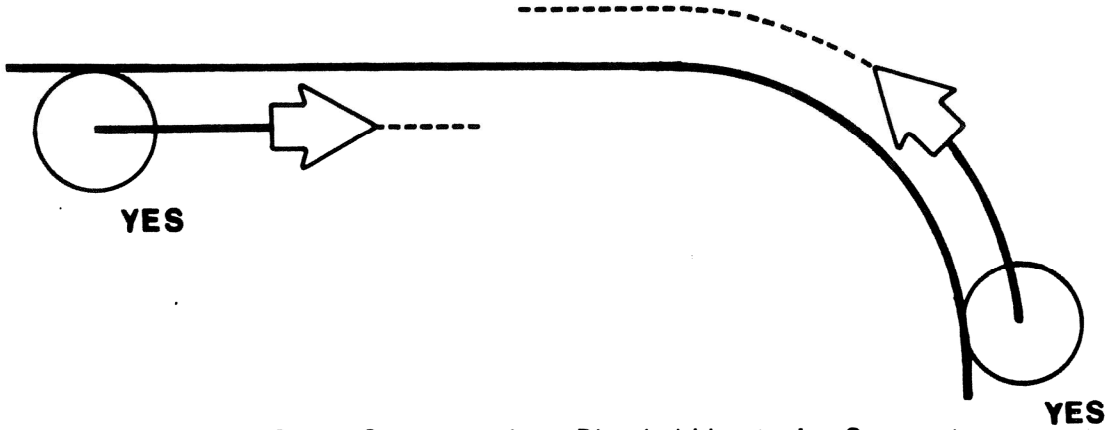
Cutter Compensation - Blended Line to Arc Segments
